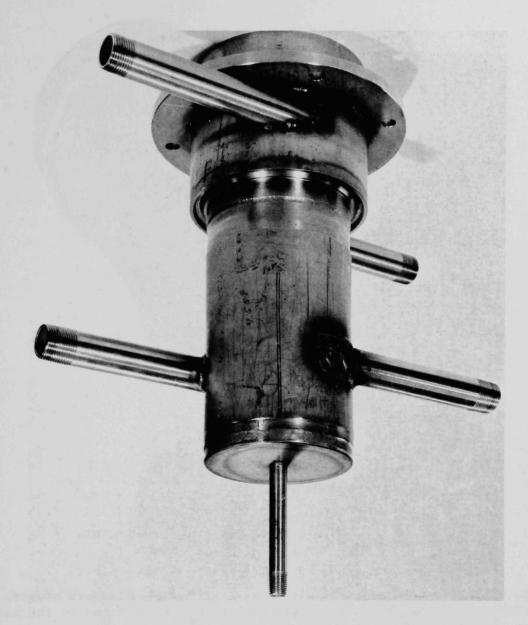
Housing for 0.5 Mg/d Centrifugal Contactor. ANL Neg. No. 308-77-605
